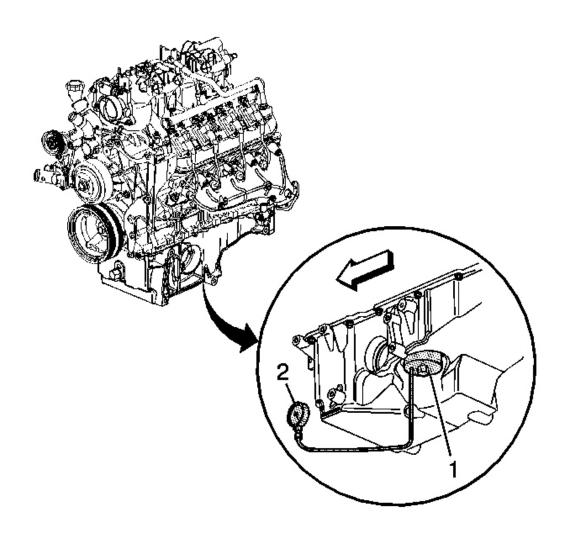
View Of J 21867 & J 42907 Courtesy of GENERAL MOTORS CORP.
